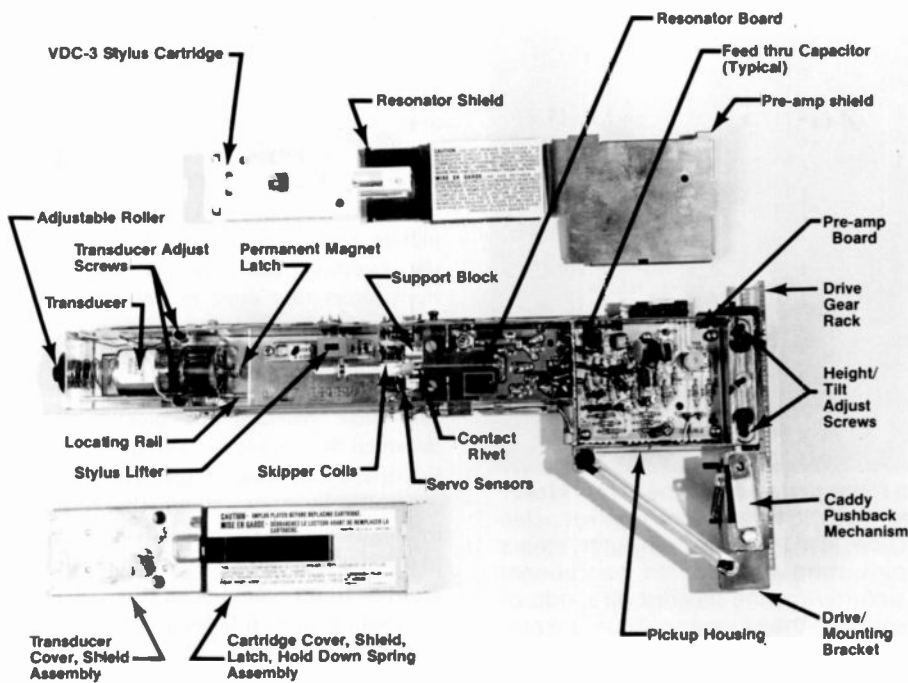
The pickup housing assembly, Model VDH-3. The pickup housing assembly measures 14-inches long by 1-inch high by 6-inches wide at the driven end, and weighs 1.5 pounds. The functions of this assembly, while similar to a conventional audio tone arm, are varied and complex. In addition to housing the stylus cartridge and providing the proper reference planes between the cartridge and the disc as on a conventional audio tone arm, this assembly houses: the mechanism for time-base error correction; the coils used for locked groove correction and visual search; the mechanism used for stylus lifting and set down; the electronics for initial signal retrieval and processing; the mechanism for return to start of play by the caddy; and the drive-gear rack for powering the housing assembly during play.
